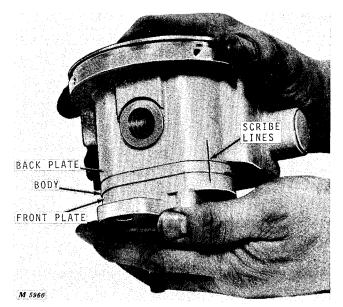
Positioning Front Plate and Gear Assembly on Back Plate
